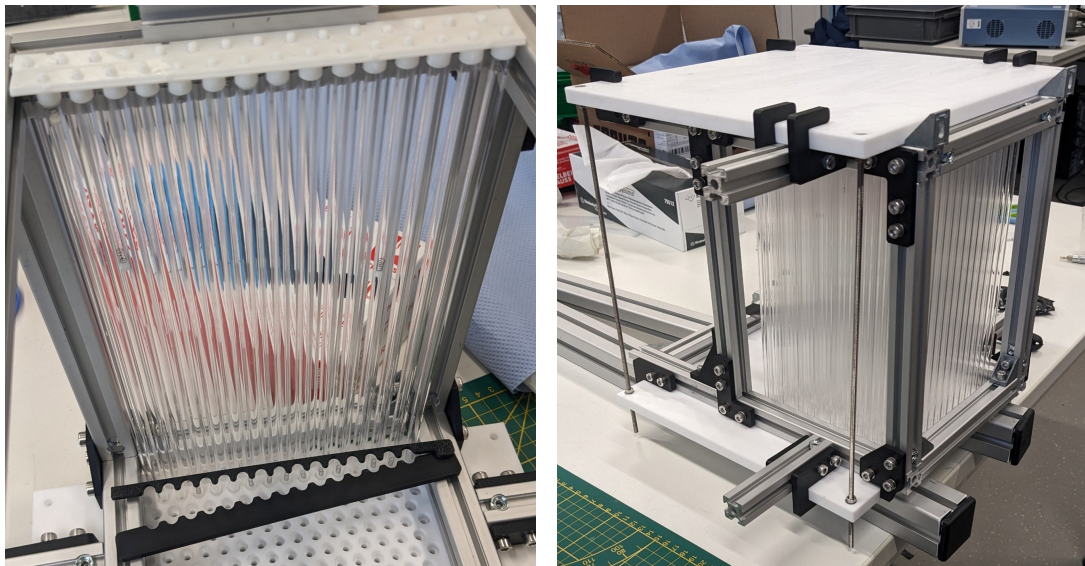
Left: Assembly process of placing the Bubo tubes row by row with the auxiliary clamp visible. Right: Completed inner assembly that has yet to be rotated and is then transport-ready.
